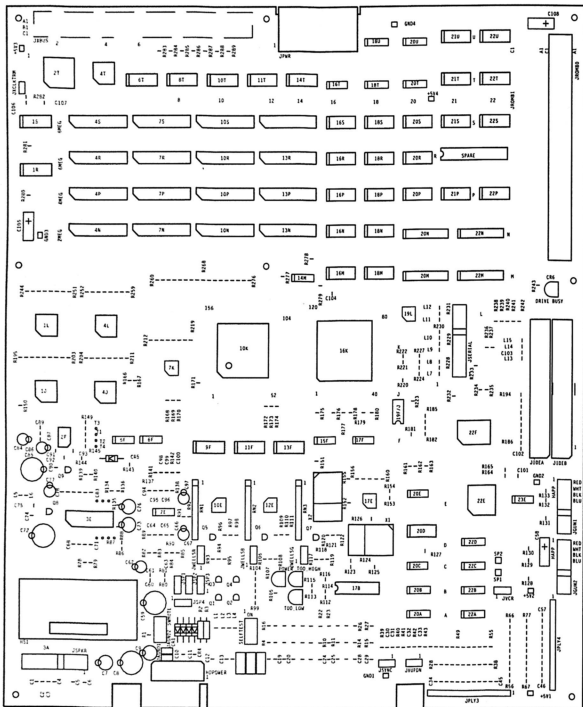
Area 51 Cojag PCB Assembly (Top Side)
